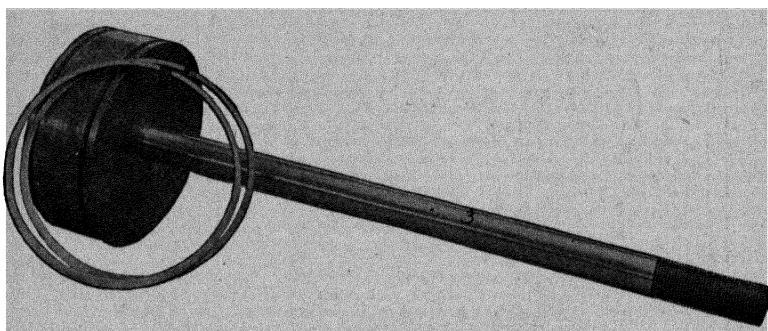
Piston, Showing Piston Rings for Making Steam-Tight Joints
